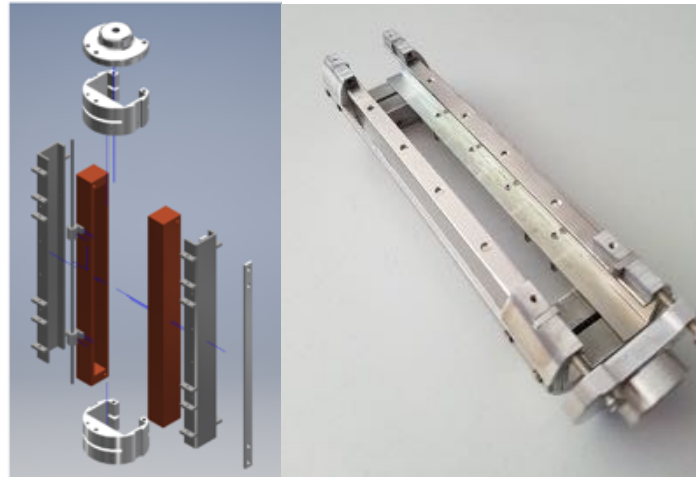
3D exploded view of the mechanical tuning mechanism (left) and prototype of the tuning mechanism ($l= 16.5$ cm, radius = 4.0 cm) made of aluminum and stainless steel (right).
